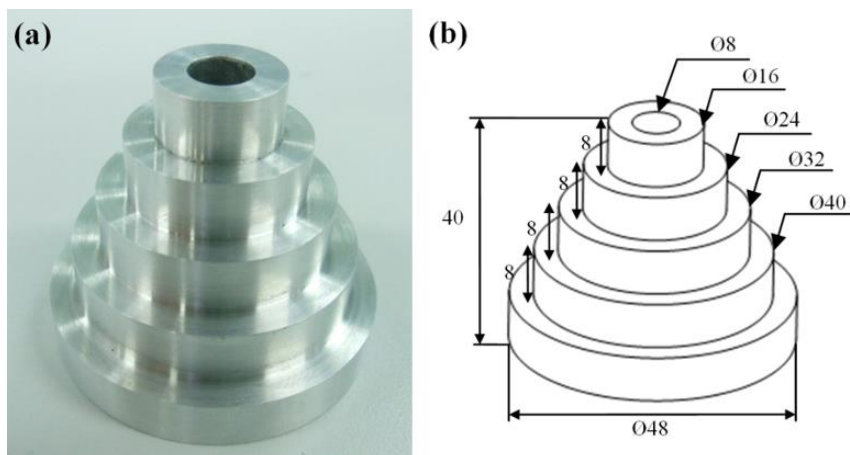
Reference Hollow Stepped Cylinder (HSC) part for system calibration (a) view; and (b) drawing [mm].
